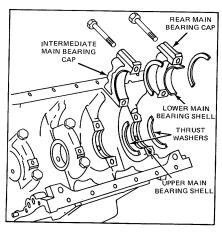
Main Bearing Shells, Bearing Caps, and Crankshaft Thrust Washers -In-Line Engines
